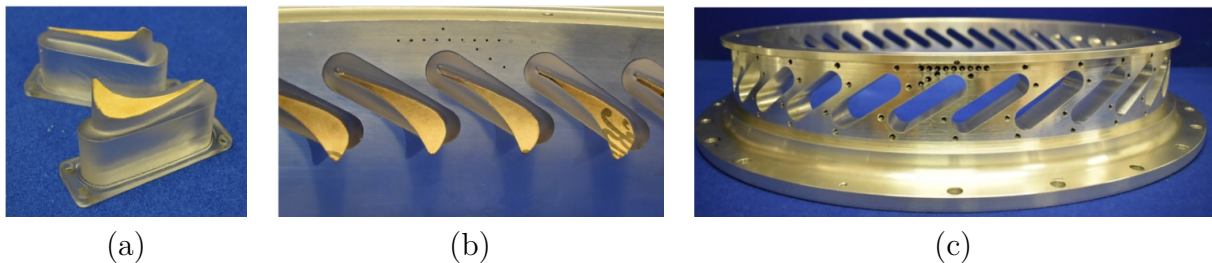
Photographs of (a) SLA NGVs, (b) assembly of NGVs in casing mounting ring with static pressure tappings visible and (c) casing mounting ring.
